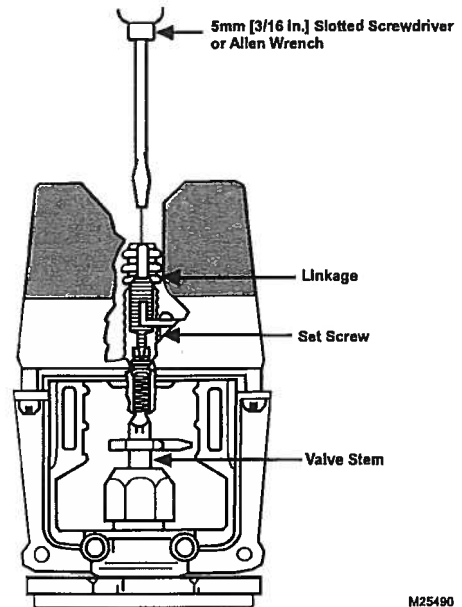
Locking MLx984A Drive Shaft to Valve Stem.
